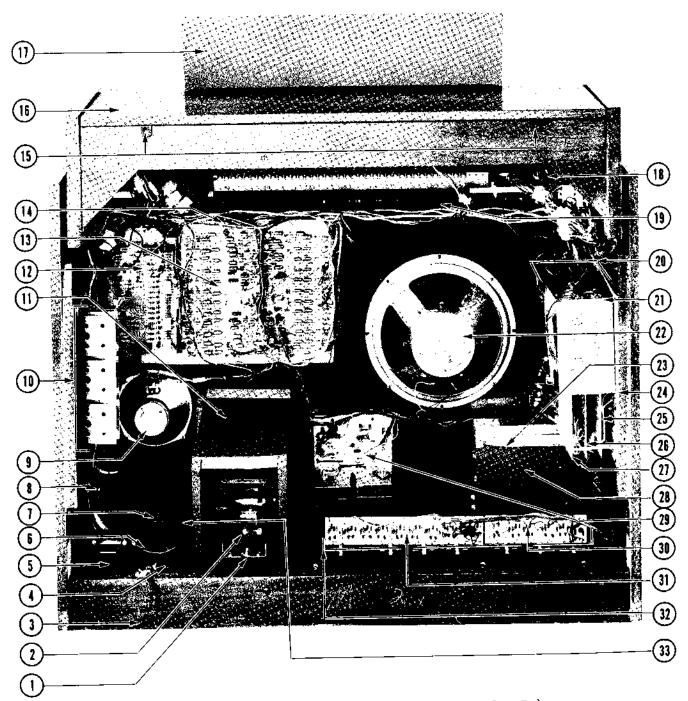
ORGAN REAR VIEW (BACK PANEL REMOVED)
